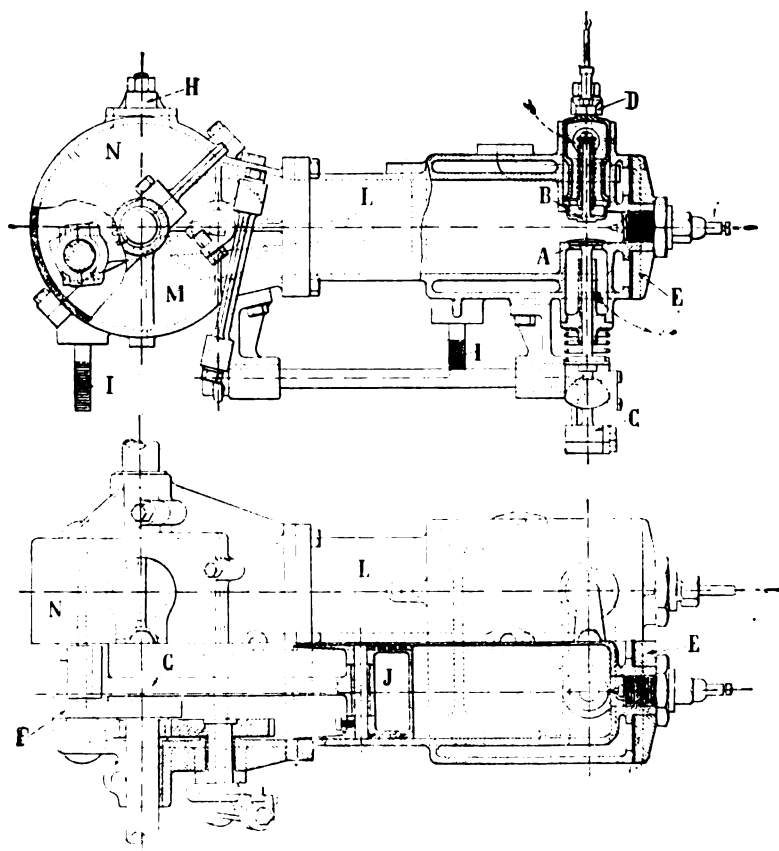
VIEW SHOWING INTERIOR OF ENGINE CRANK AND VARIABLE-SPEED GEAR CASE.
